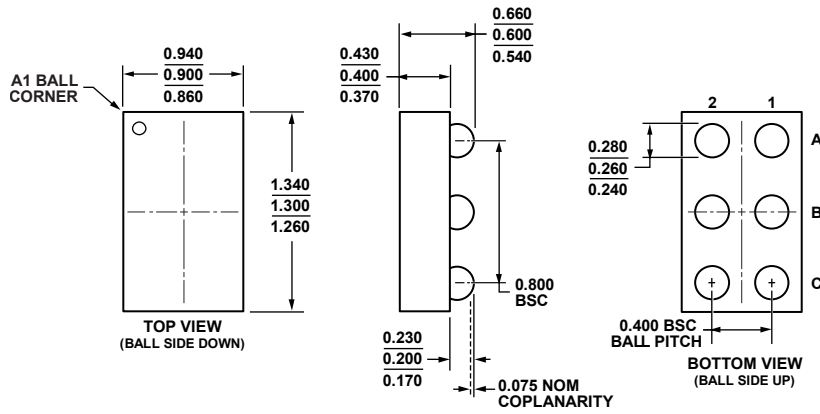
6-Ball Wafer Level Chip Scale Package (WLCSP)
